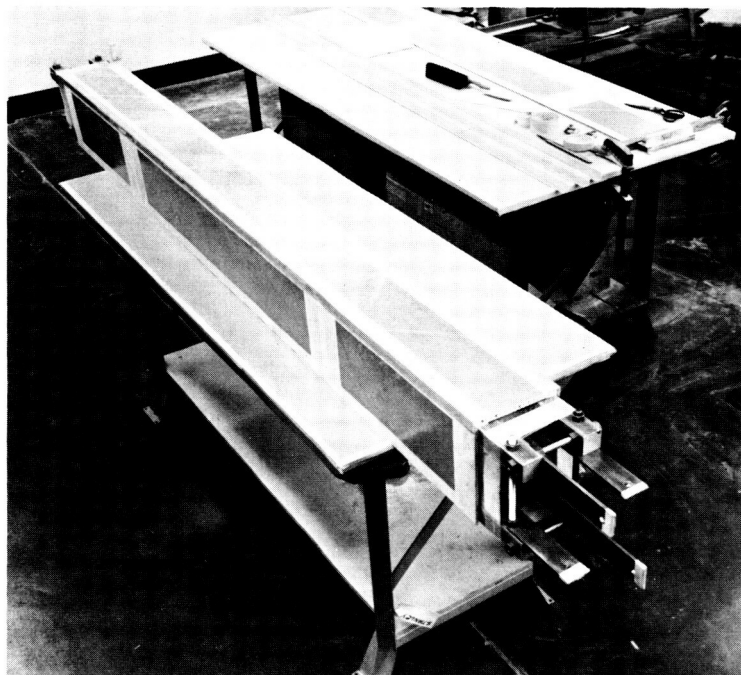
Fiberglass Reinforced Box Beam Assembly Fixture, Showing a Shear Web, Upper Panel, and Two of the Assembly Angles in Position
